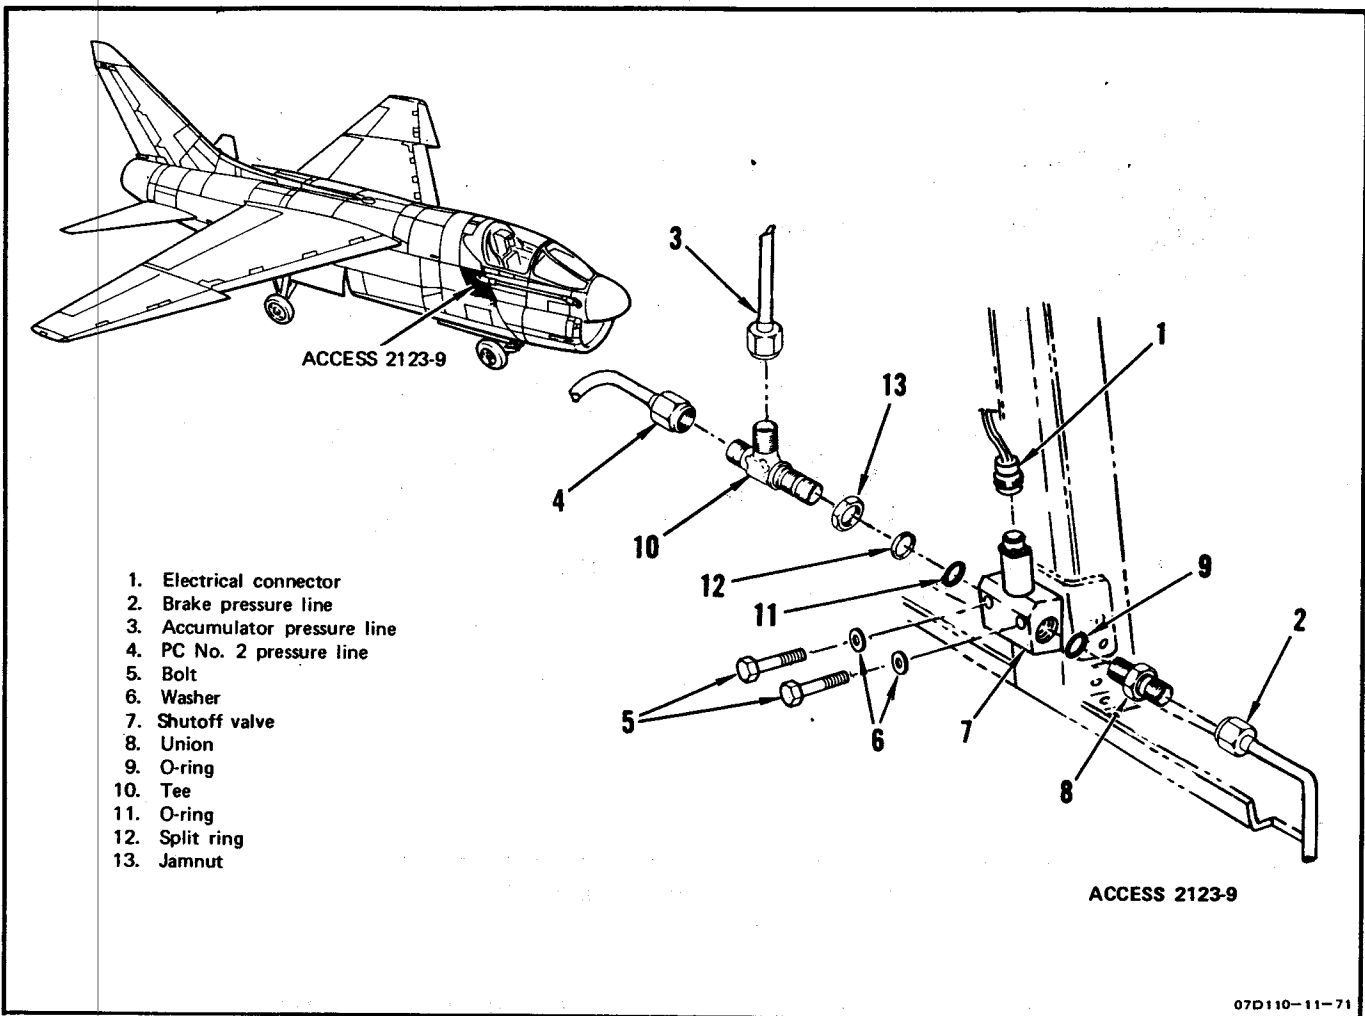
Brake Accumulator Shutoff Valve Removal and Installation
